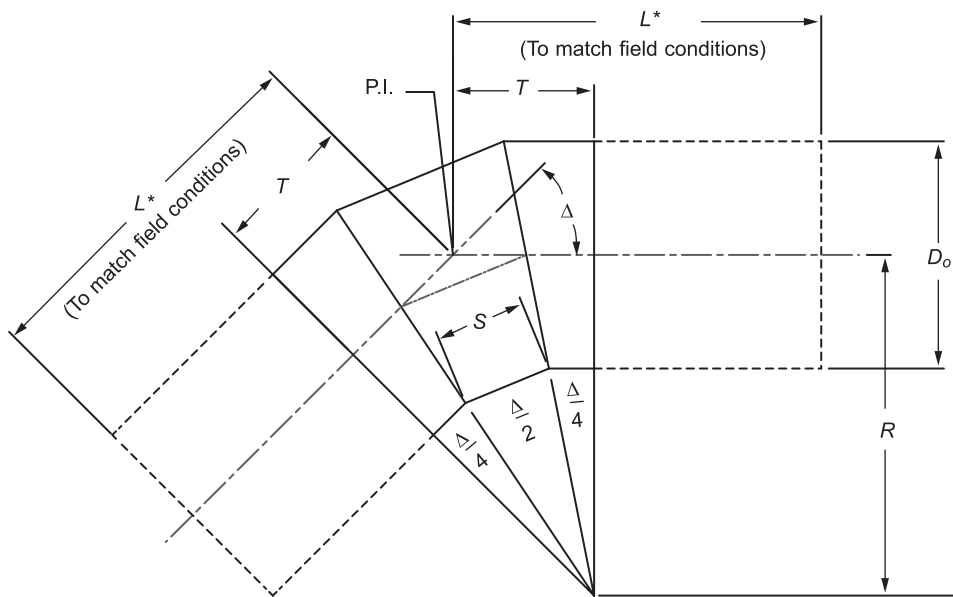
D Three-piece elbow (more than 22.5° to 45°)
